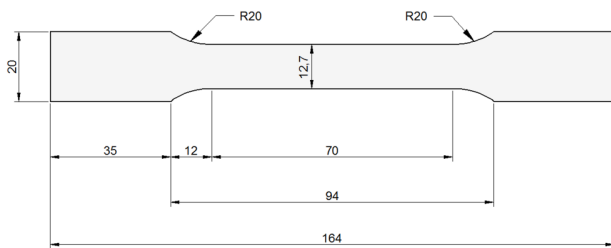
Uniaxial tensile specimen dimensions (mm)
